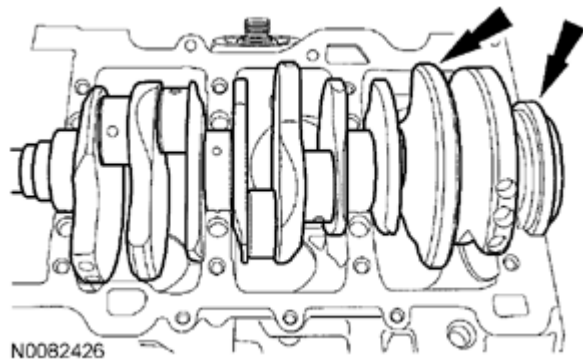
Locating Crankshaft Rear Main Seal And Crankshaft
